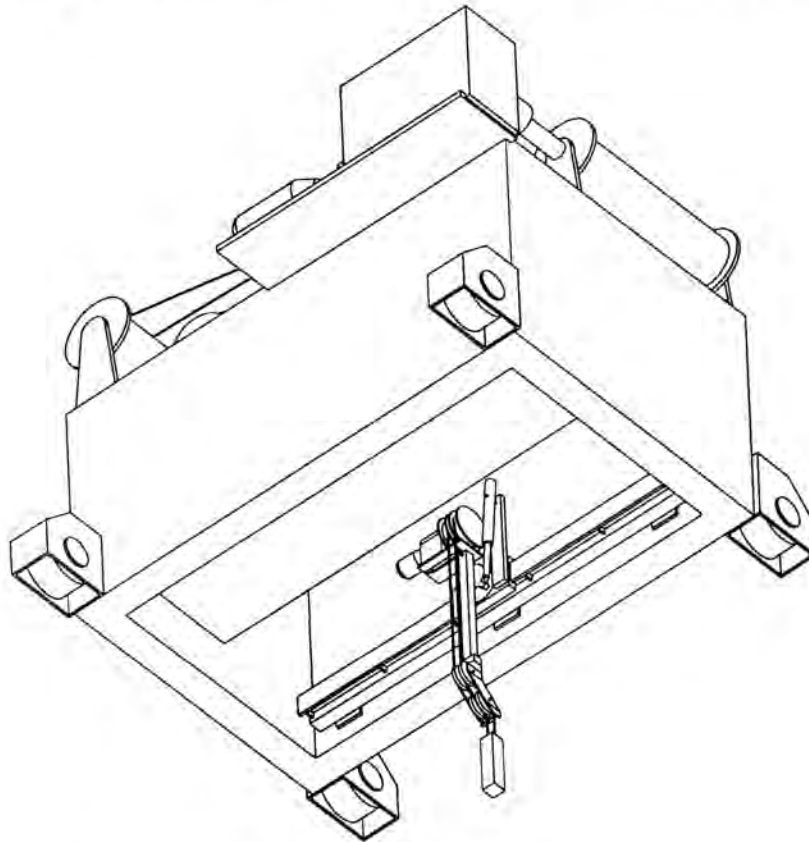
ROLMAs With Inspection Gear in Unfolded Position.
